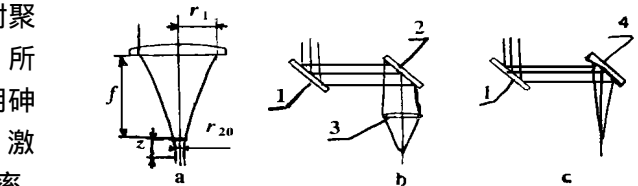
Two kind of laser beam focusing for laser cutting and welding 1, 2—plane reflector 3—focusing lens 4—curved mirror
